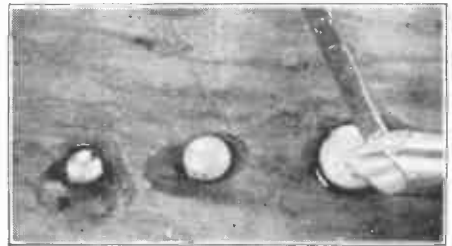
Method of increasing the size of a molten globule of solder by feeding rosin-core solder to the soldering iron tip while it is in contact with the globule. The three globules used in Experiment 2 are shown clearly in this view. The darker rings on the board around each globule are formed by the surplus rosin flux, which is a yellowish liquid when heated. If you look closely, you will see your own image in the surface of a molten solder globule, just as if it were a tiny curved mirror. The image vanishes gradually as the solder hardens.
